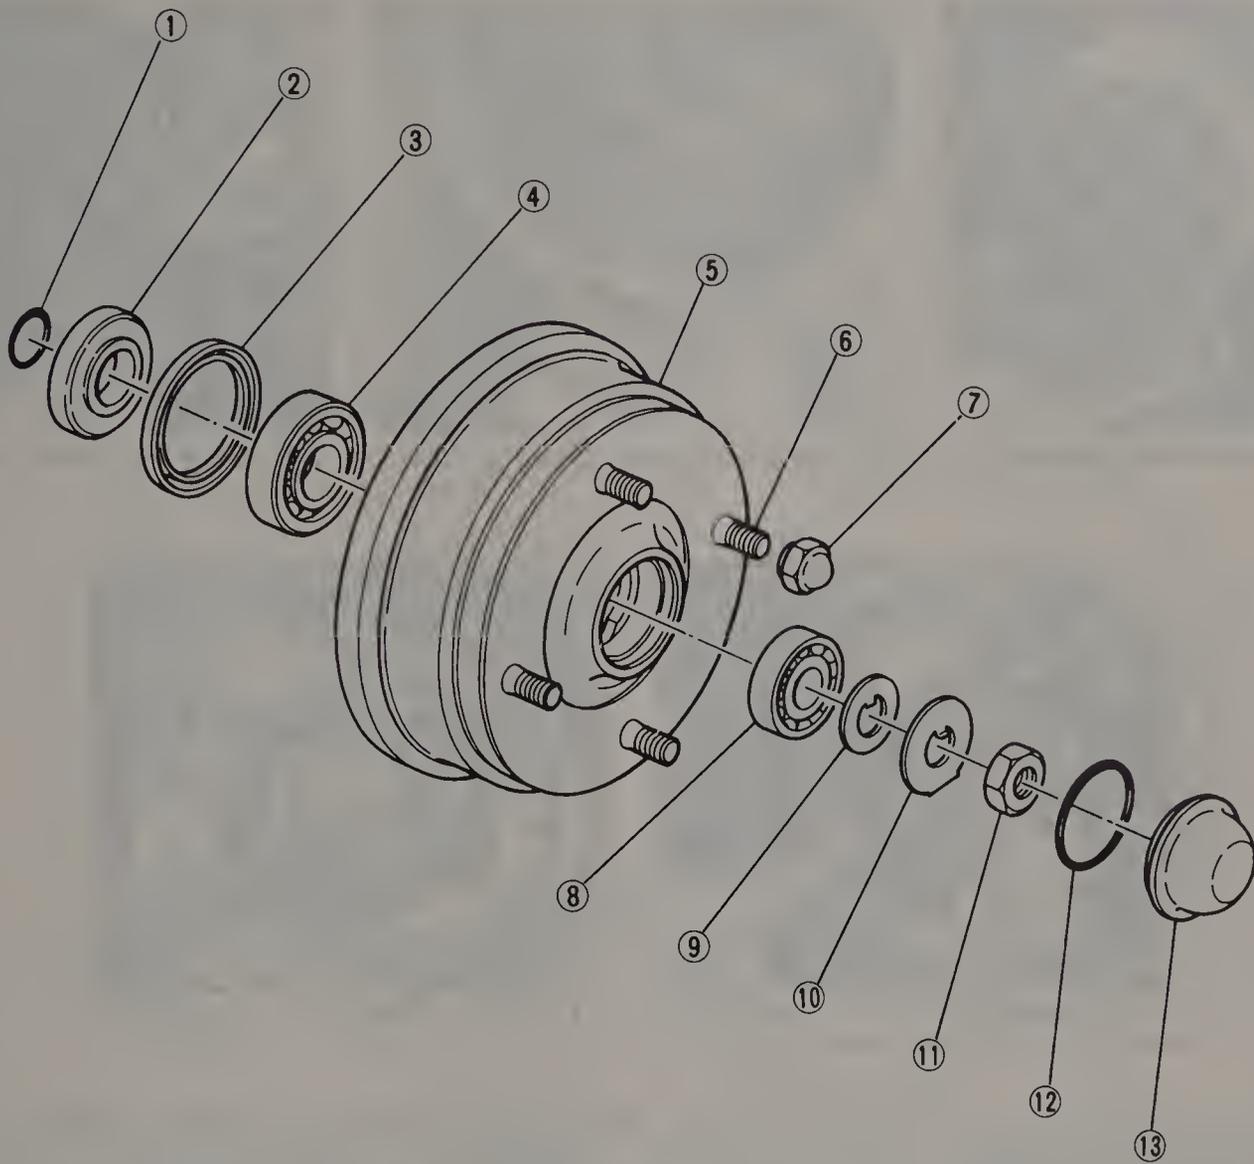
2WD brake drum components – exploded view (Sec 10)
